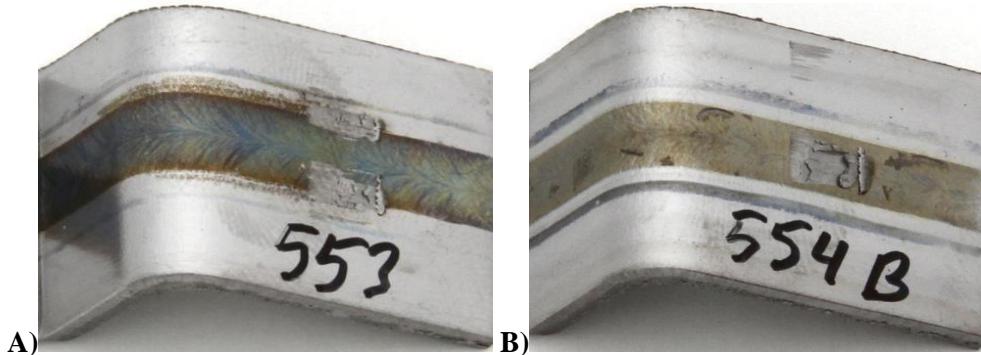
Strauss test samples: Failed as-welded sample (A) and passed PWHT sample (B). Material Producer C 1.4016, thickness 2.0 mm, heat inputs 0.21 and 0.22 kJ/mm.
